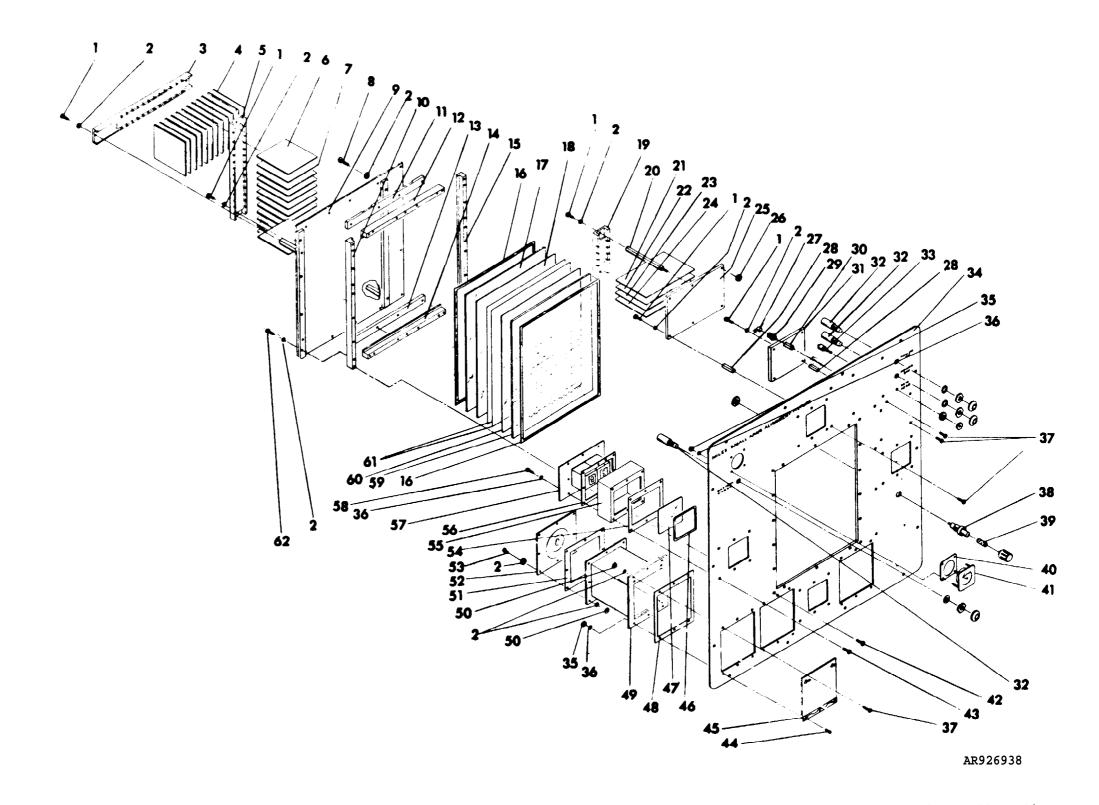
Panel Assembly, Alignment Fixture Laser: M1 for Small Arms (sheet 1 of 2)
